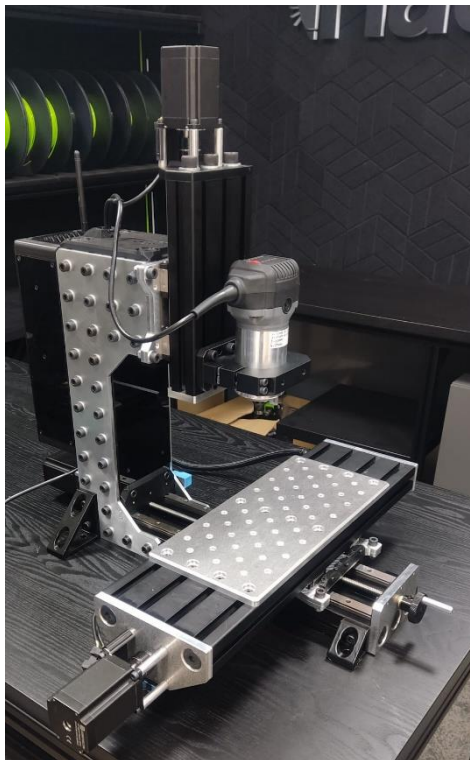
First Mill machine prototype, made in-house, to test geometries, fitment and tolerances.
